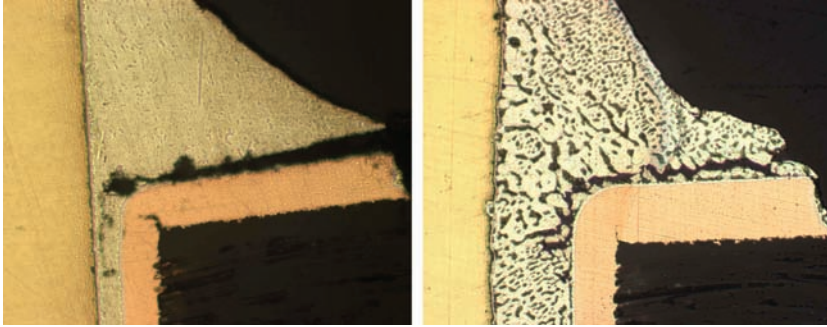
Microsections of through-hole joints after thermal cycling. The image on the left was produced with SnAgCu tin/silver/copper and the one on the right with SnPb tin/lead. In both cases, they show evidence of expansion of the board against the solder joint, leading to some separation of the topside solder fillet, but no electrical failure.
